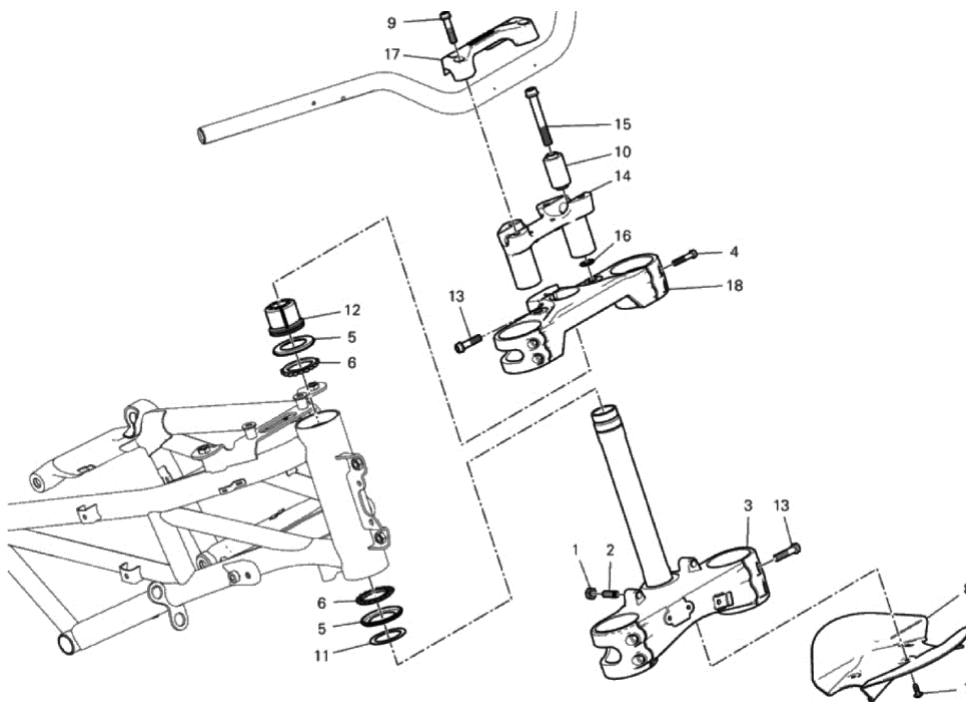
Explode view of steering arrangement for Multistrada (Ducati, 2020b).
